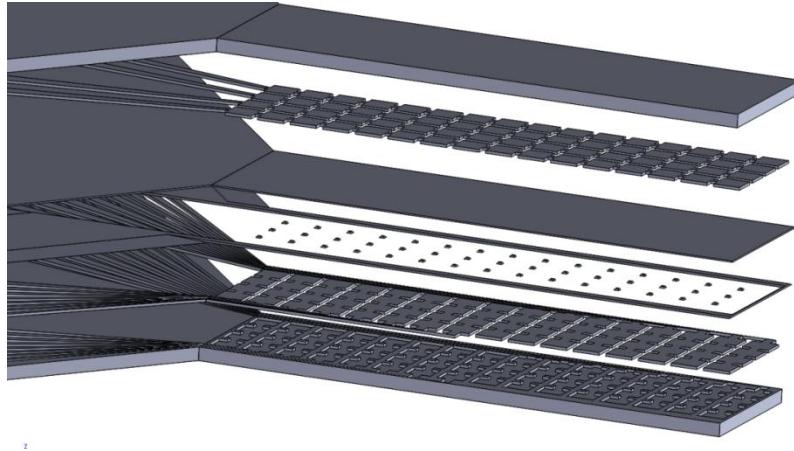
Exploded view of the final configuration of different layers of the Sensor
